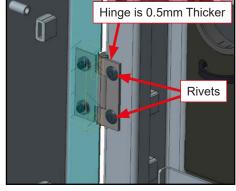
Inside Cabinet View Cabinet-Side Rivets
